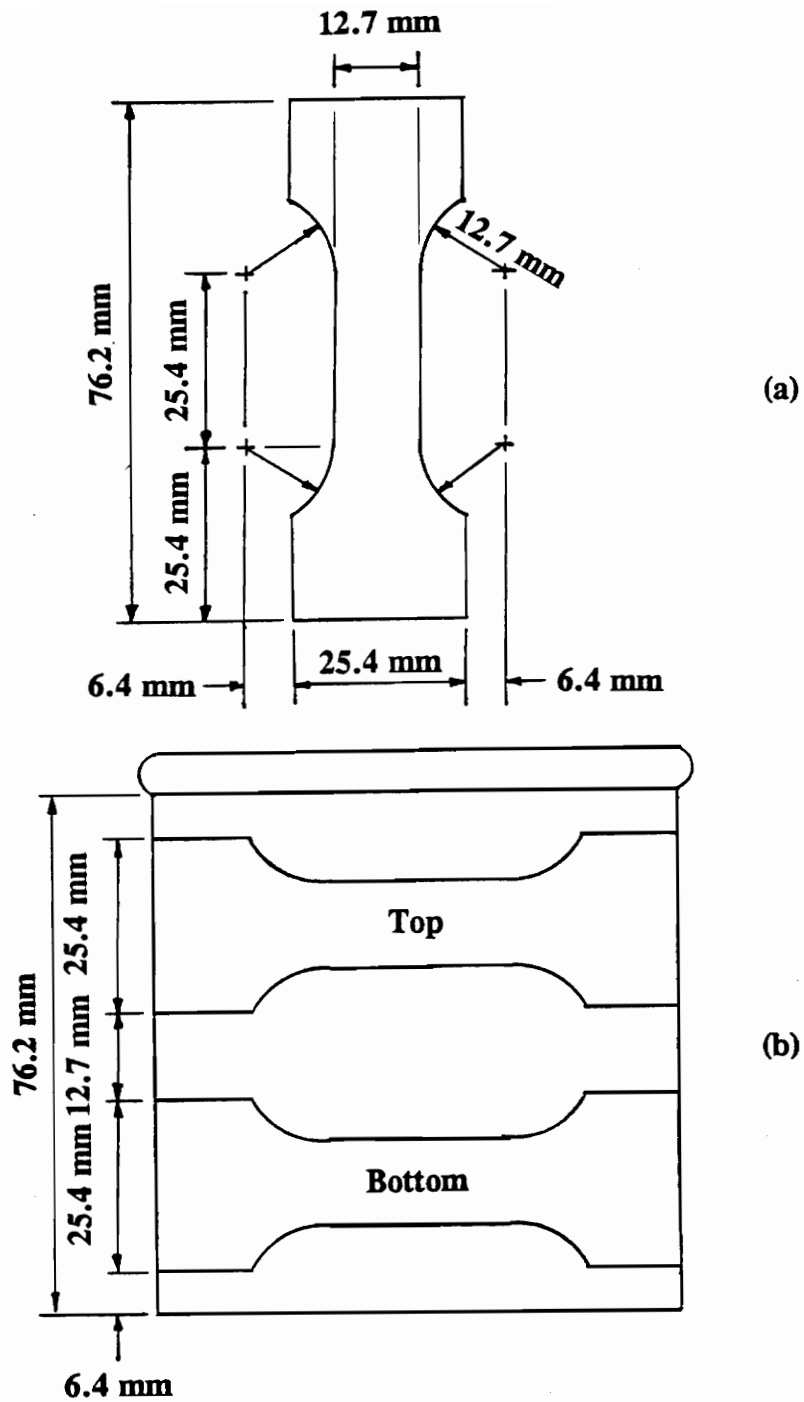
Tensile test specimen (a) geometry of the specimens (b) shows the locations of the specimen being cut from the injection molded plaque
